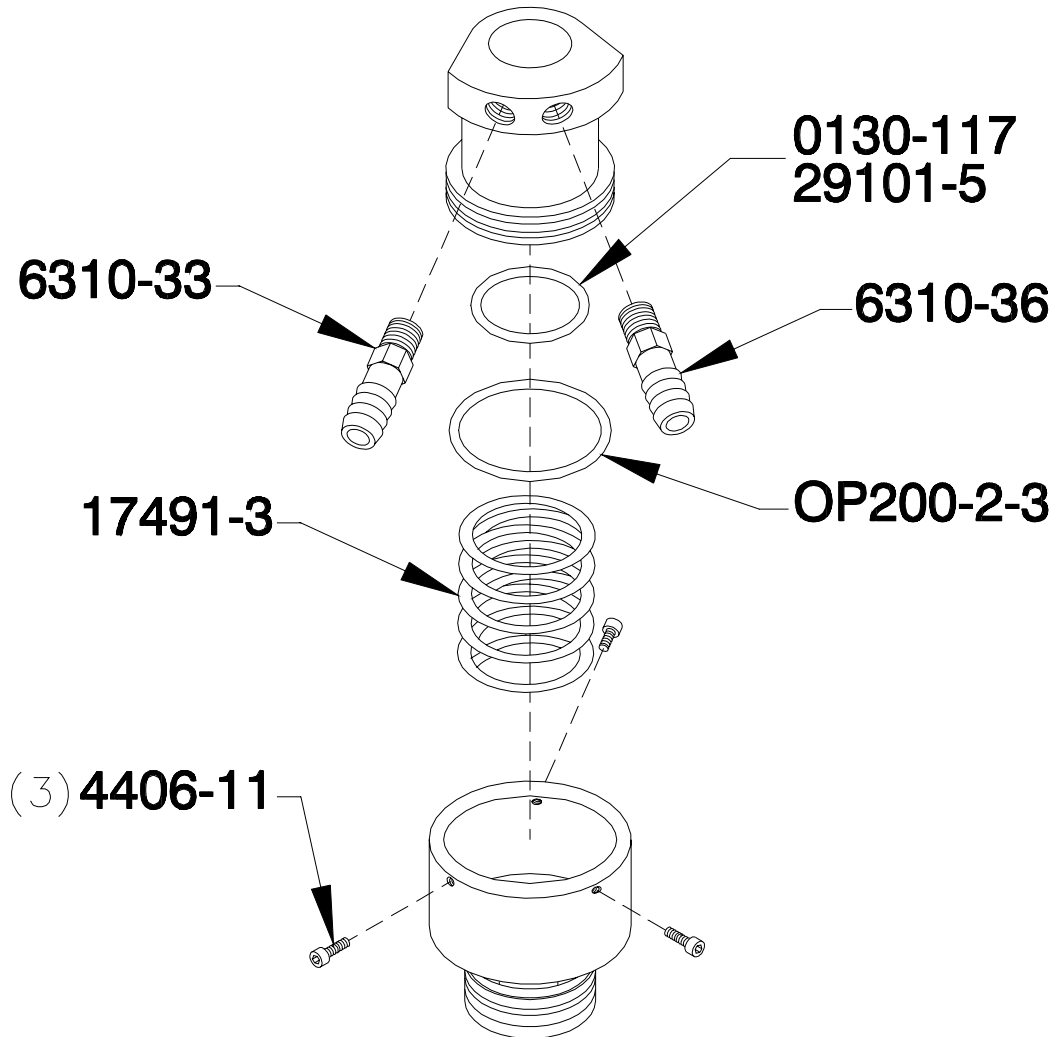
Lube Pump Assembly, (Part No. 17491-52/17491-60), Exploded View
